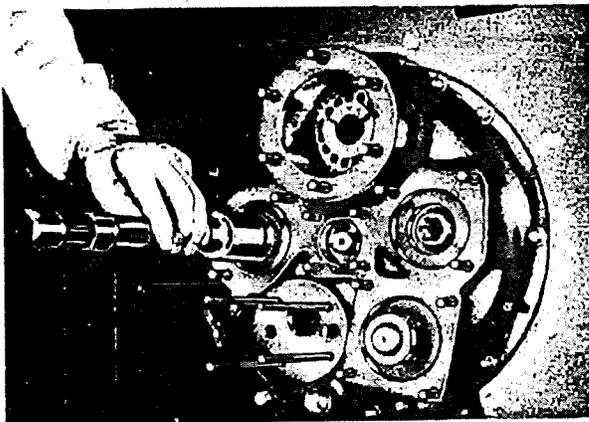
Installing Generator and Magneto Drive Gear Oil Seals
